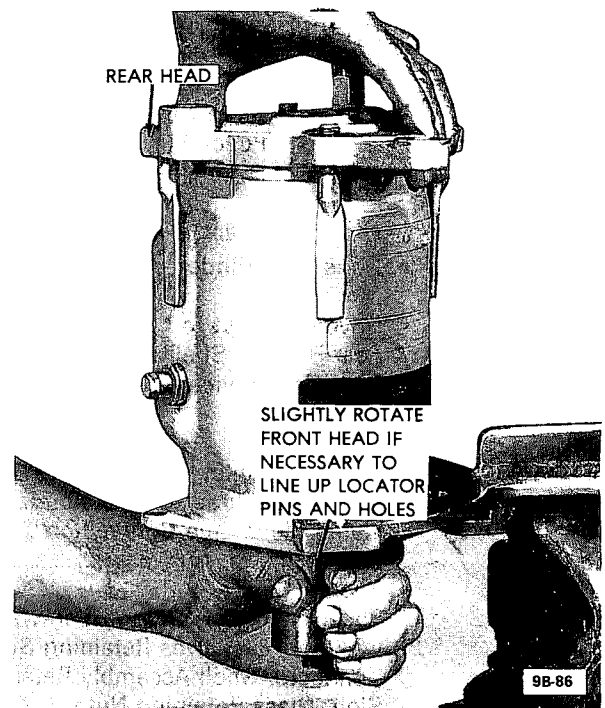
B-113 Installing Rear Head - 6 Cylinder Compressor
